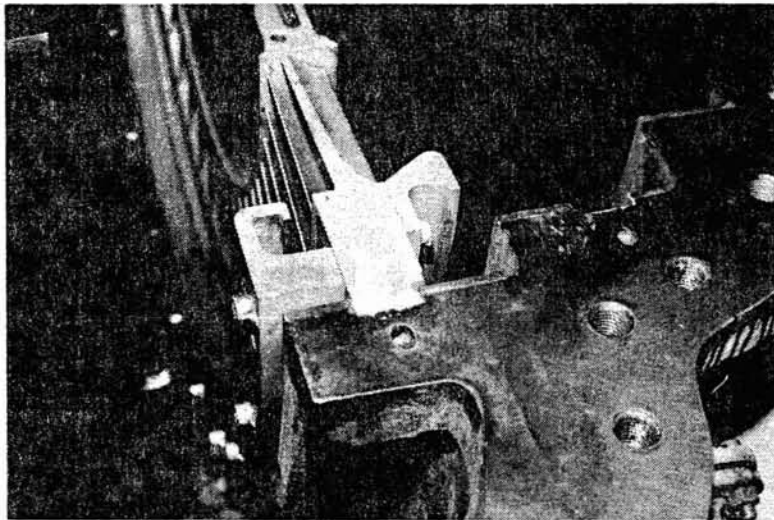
Diaphragm Resetting on Assembly with Teflon Tape
